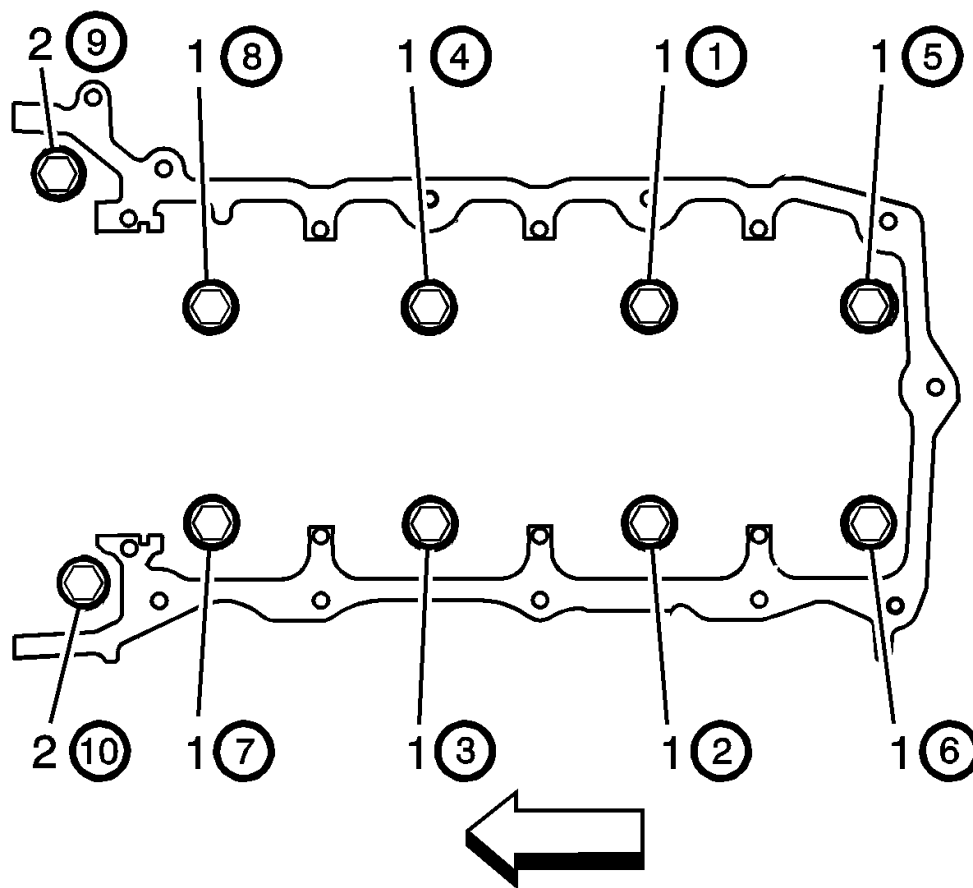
Identifying M11 Cylinder Head Bolt Tightening Sequence
